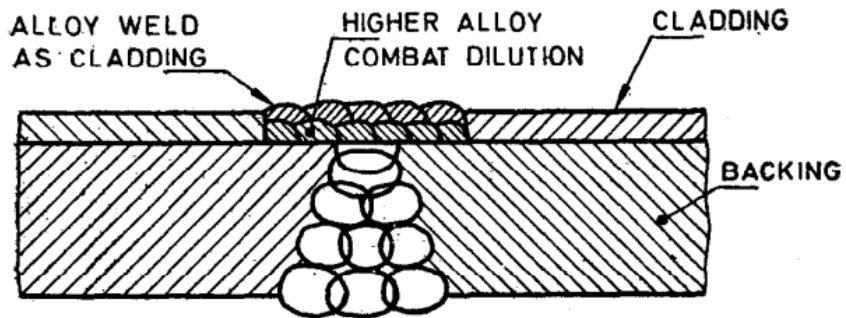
WELDING SEQUENCE FOR CLAD PLATE
